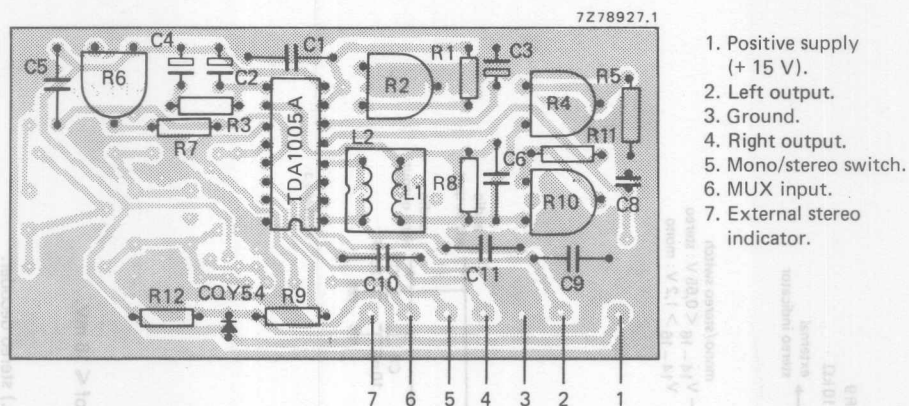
Printed-circuit board component side of an f.d.m. decoder, showing component layout. For circuit diagram see Fig. 7.
